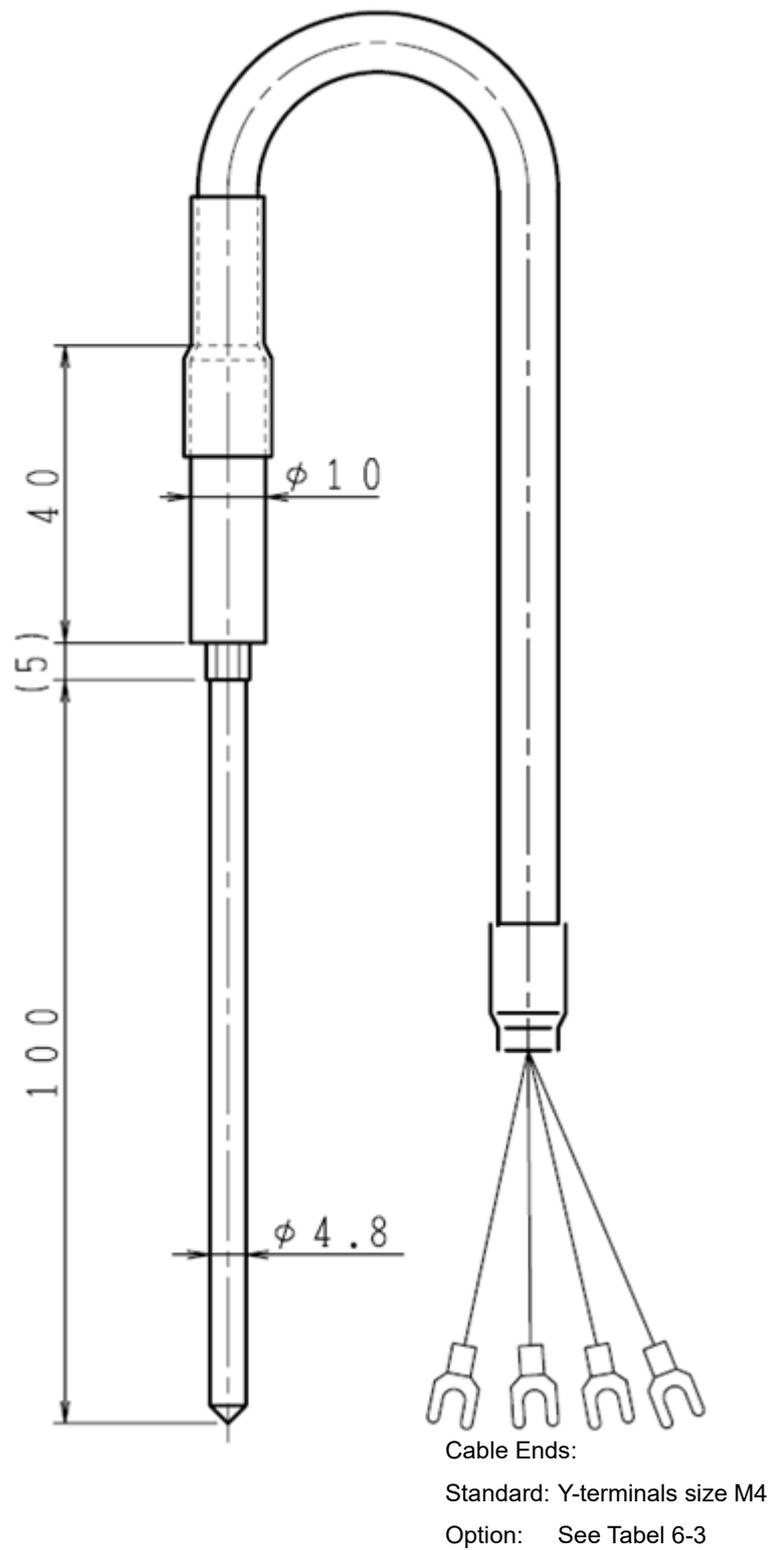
MT-010-A Temperature Sensor Dimensions
